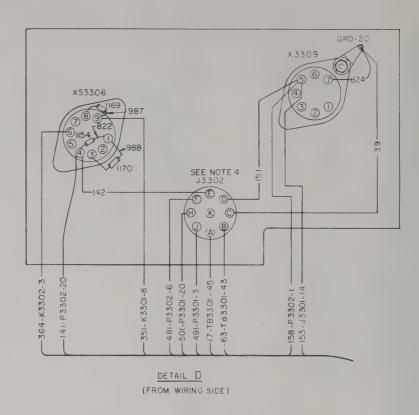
26. Channelizer Subassembly, Wiring Diagram (Sheet 1 of 5)
